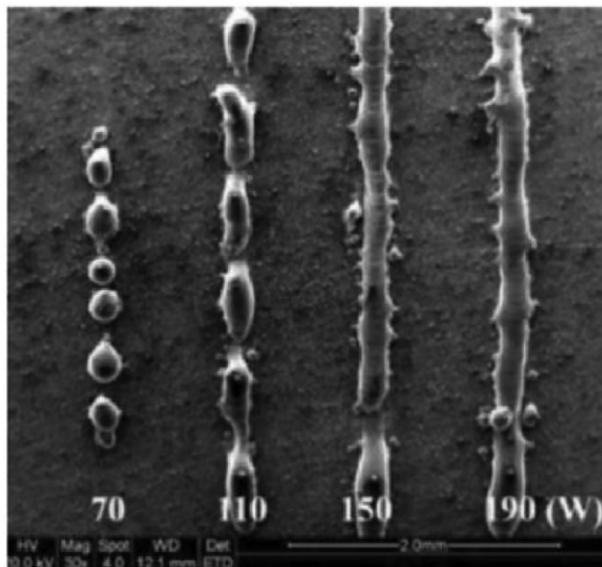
Balling defect at low laser power (SLM of 316L stainless steel) [374].
